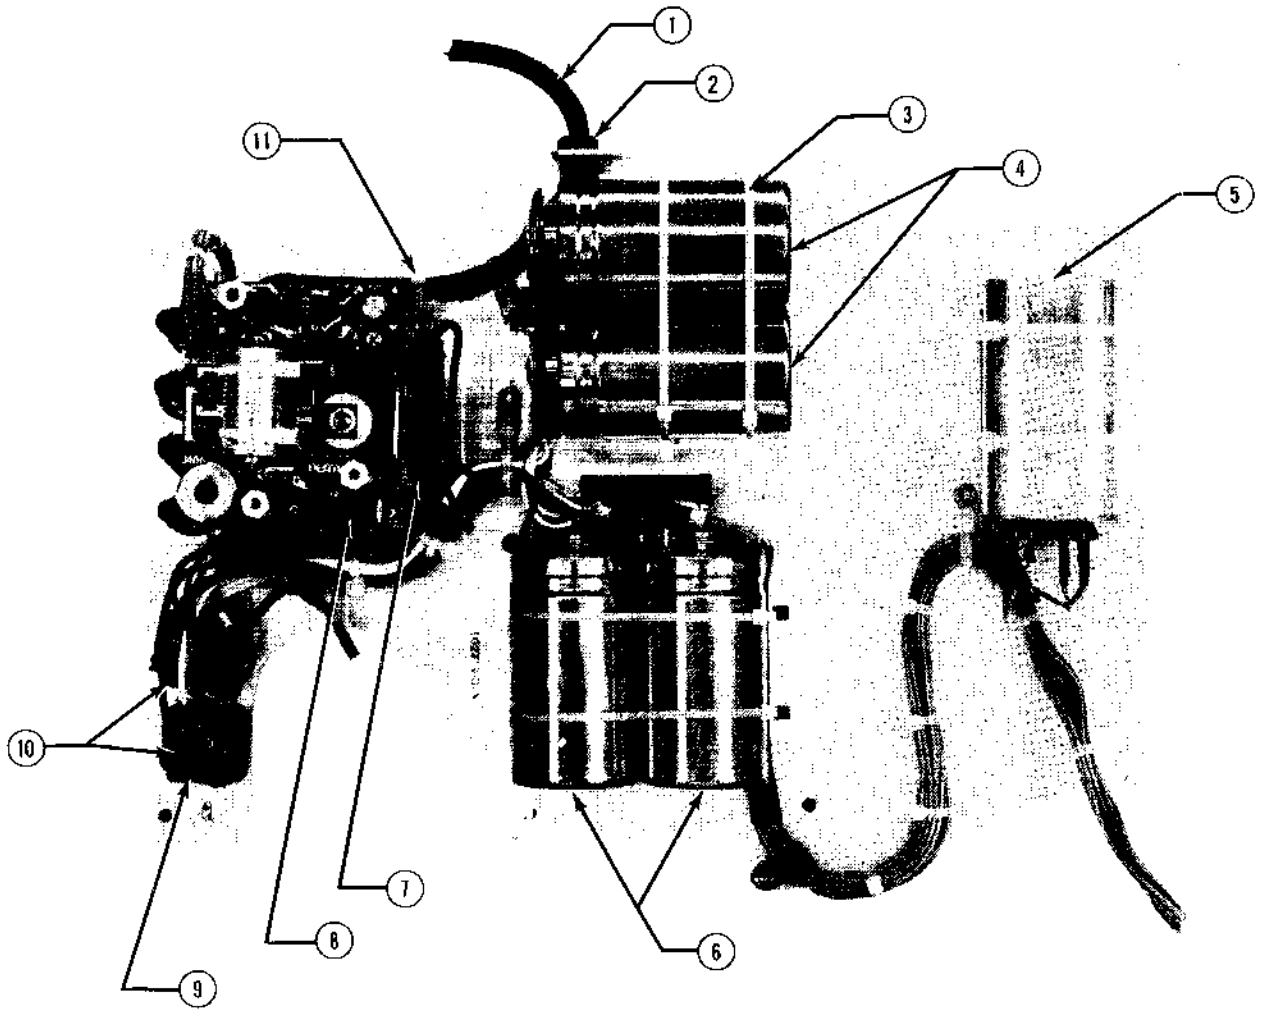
D3000 Disk Drive Photo Parts Index, Power Supply Assembly
